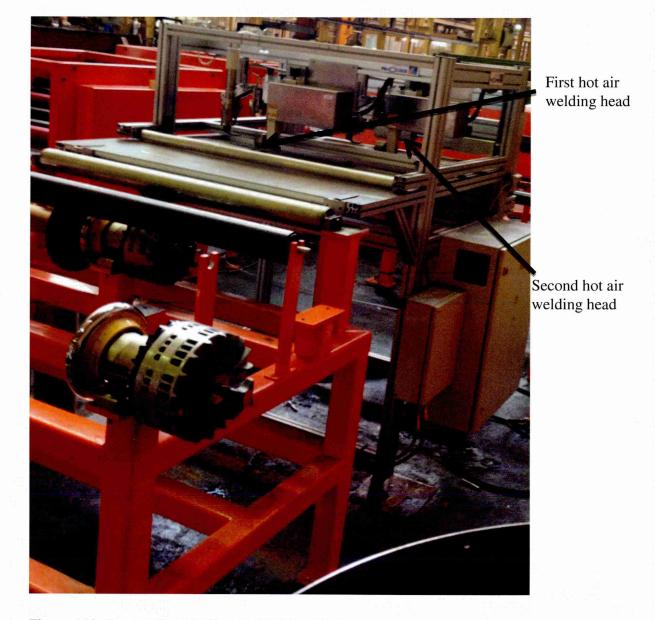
Stage 1 Double Hot Air Welding Unit.
